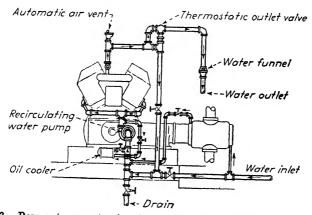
Raw water goes to air cylinders; power cylinders use closed system protected by thermostatic valve. (Courtesy of Ingersoll-Rand Co.)
